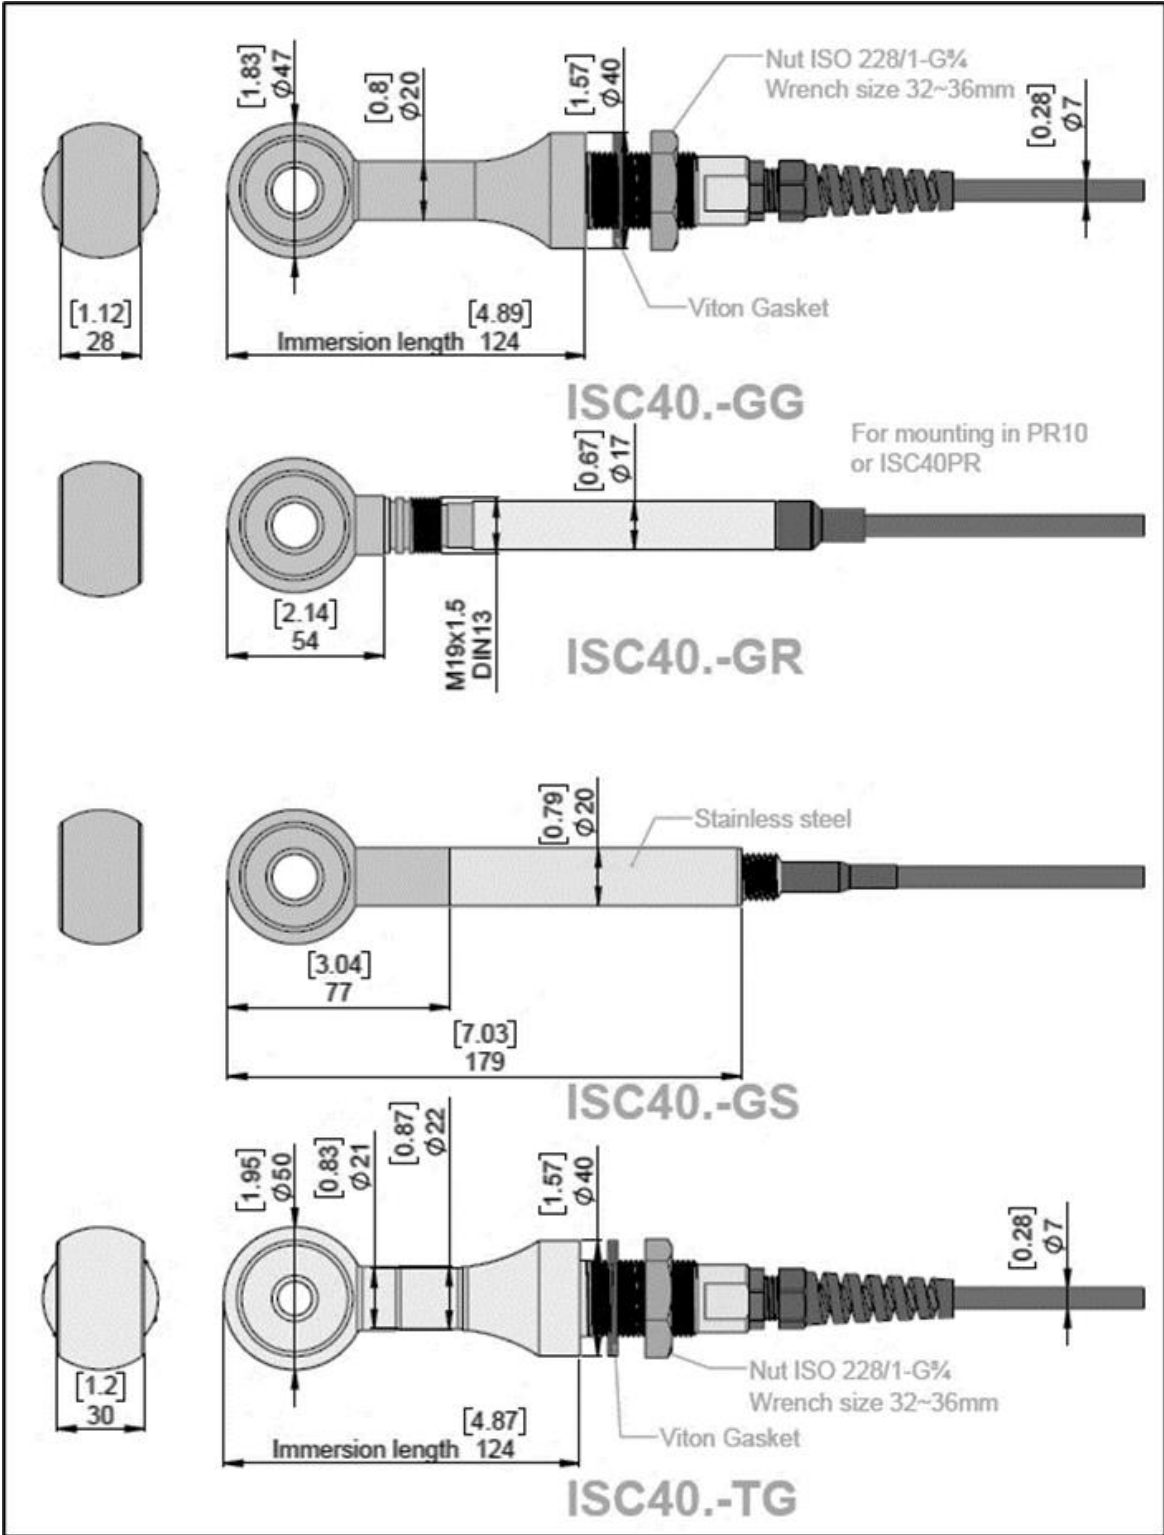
Dimensional drawing ISC40G(S)-GG -GR -GS -TG
